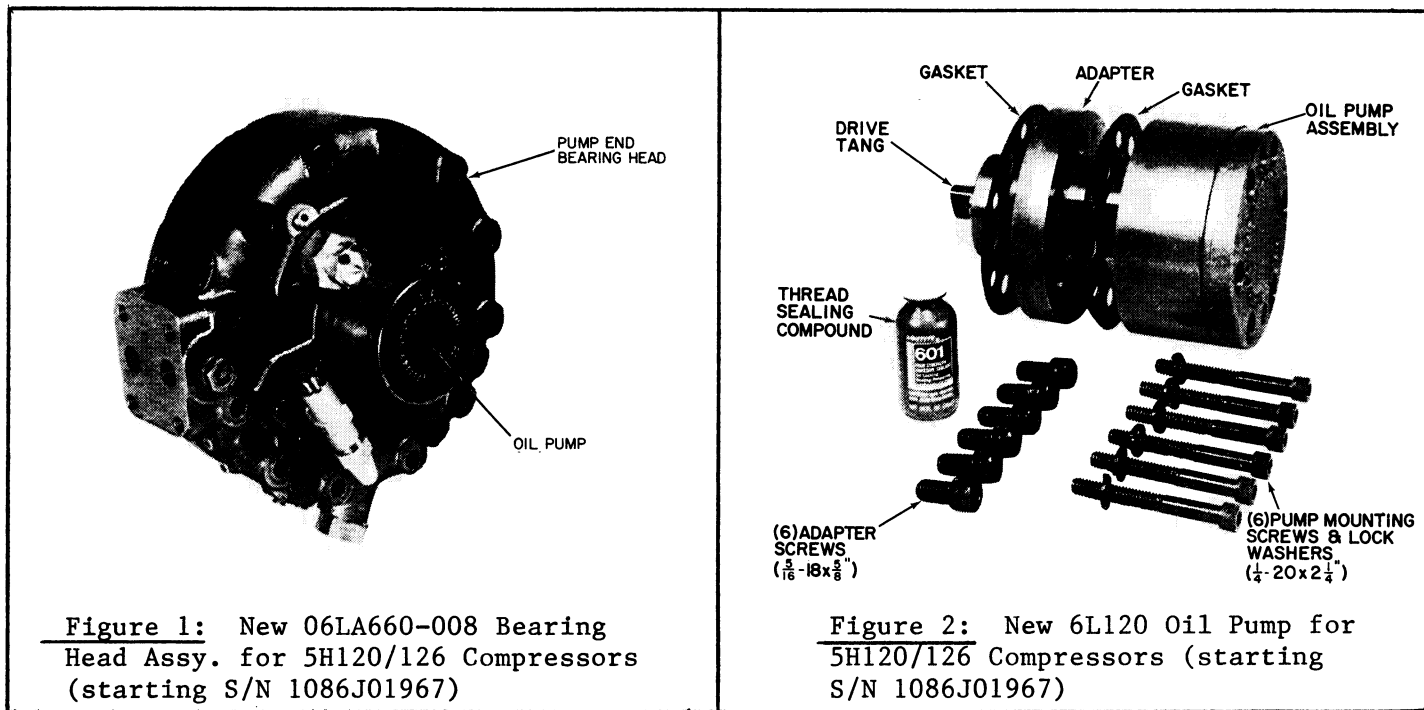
New 06LA660-008 Bearing Head Assy. for 5H120/126 Compressors (starting S/N 1086J01967)
